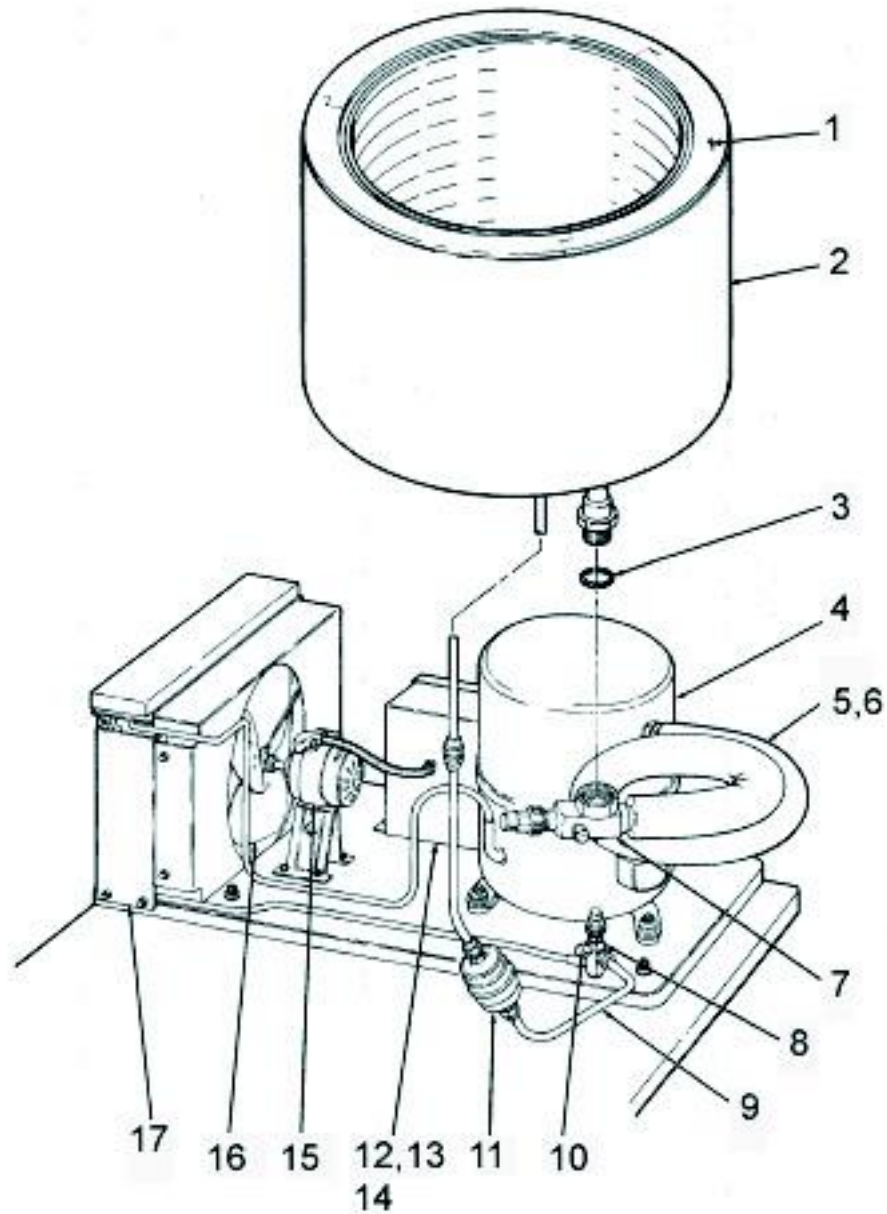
RC5C Condensing Unit Assembly and Evaporator Subassembly
